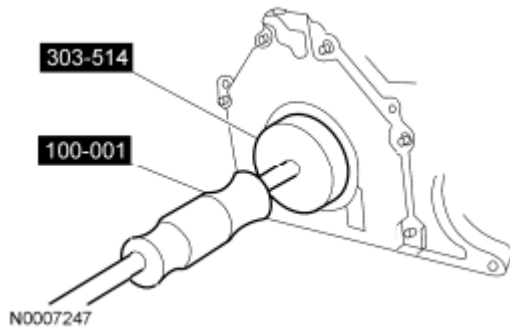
Identifying Slide Hammer And Crankshaft Rear Oil Slinger Remover
